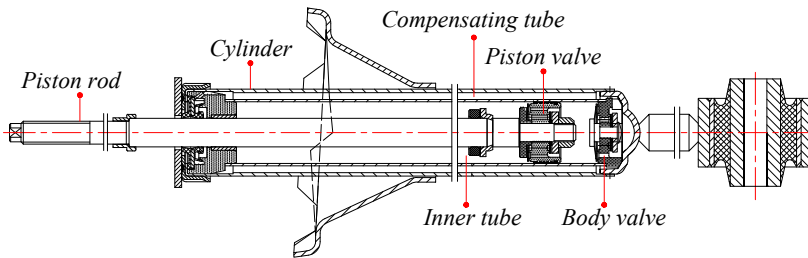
2D assembly drawing of automotive twin-tube shock absorber with shim disc valve design.
